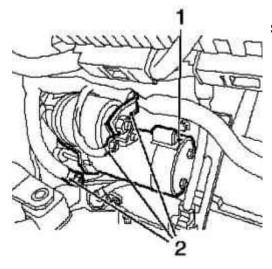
Mounting the starter: 1 -Starter 2 - retention
